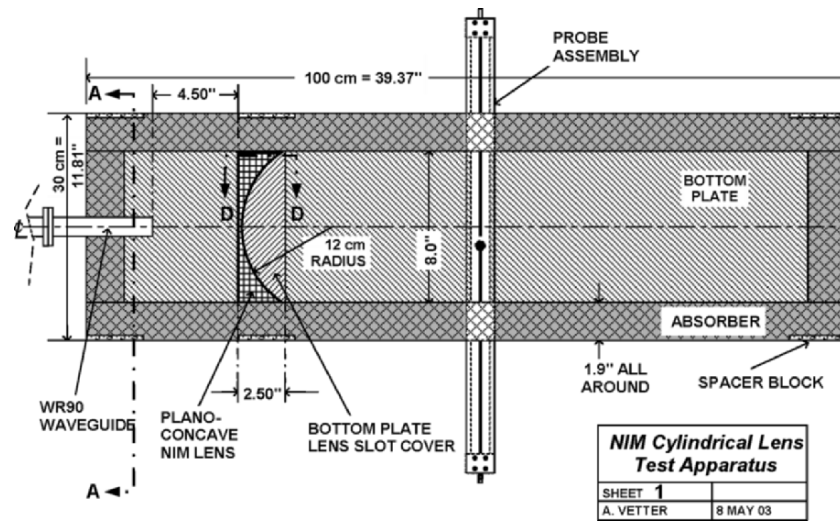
Design drawing of the scattering chamber (*top view*)
